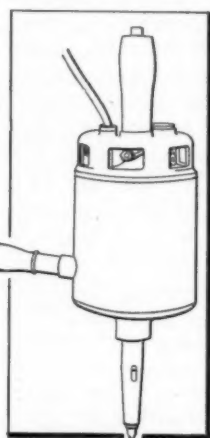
Type B Pioneer valve-grinding tool with centrally located spindle
